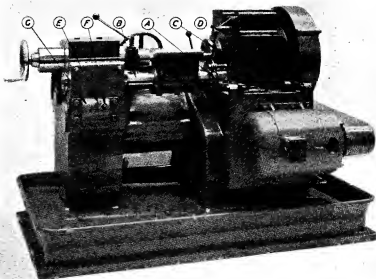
Rear view of No. 0 "Maxicut" Lathe, showing automatic cross feed control gear.
